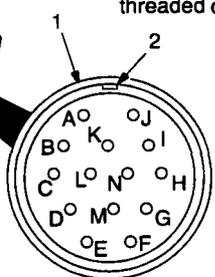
Connecting To Weld Output Receptacles
